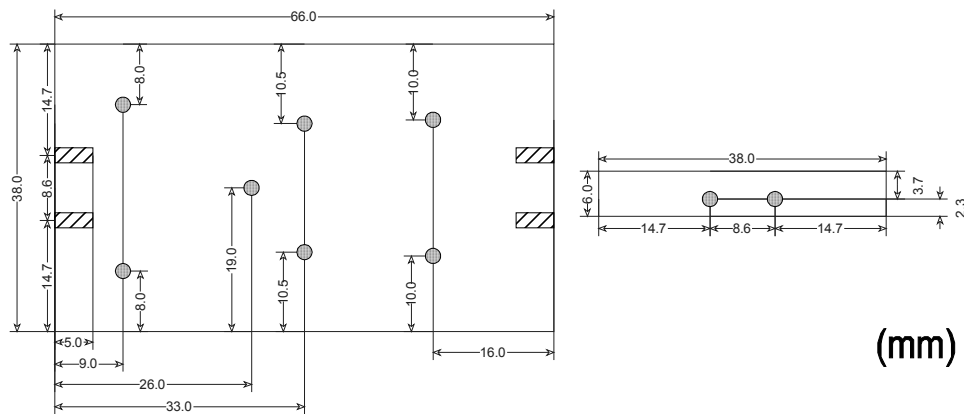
Drawing of the mounting fixture used to secure the printed circuit board.
